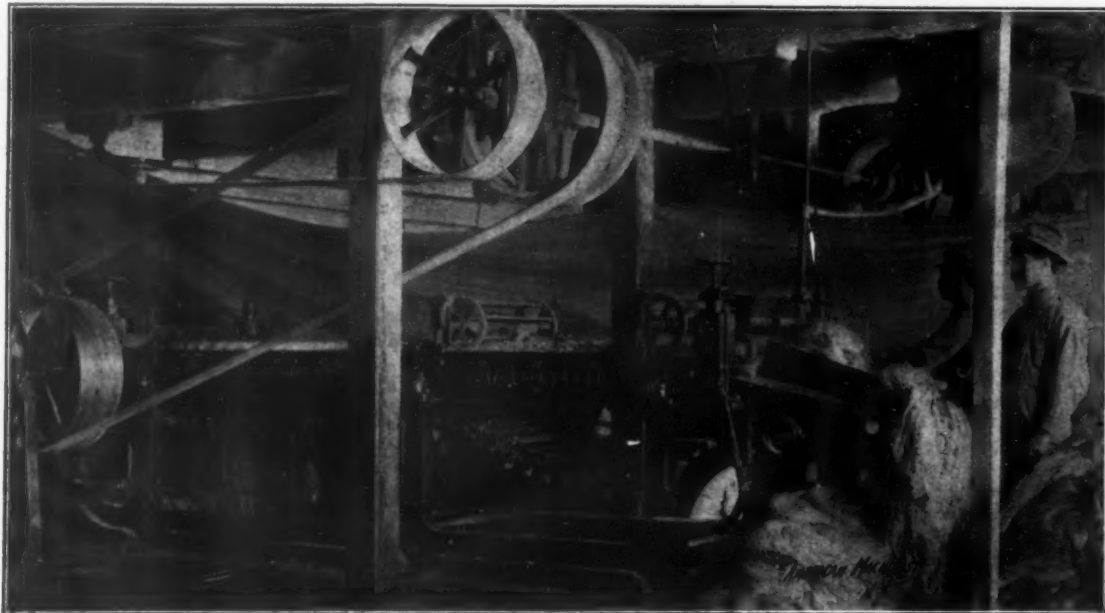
THE BREAKER OR COMBING MACHINE, SHOWING OIL SPRAYER.
